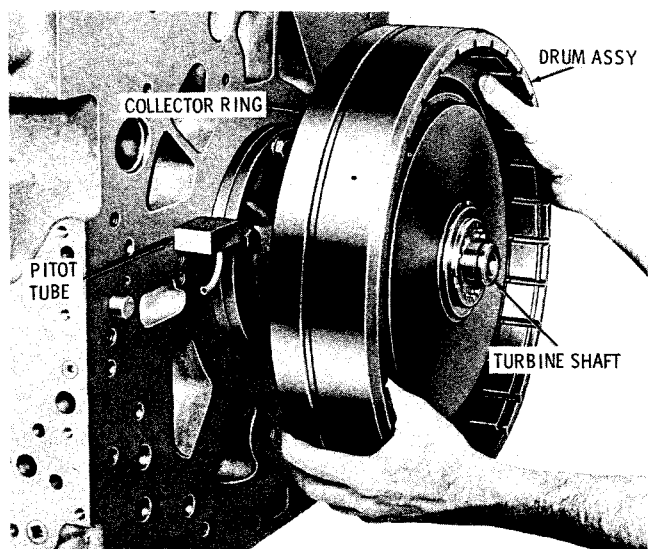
Installing low-splitter clutch drum assembly (CT, CLT, VCLT)
